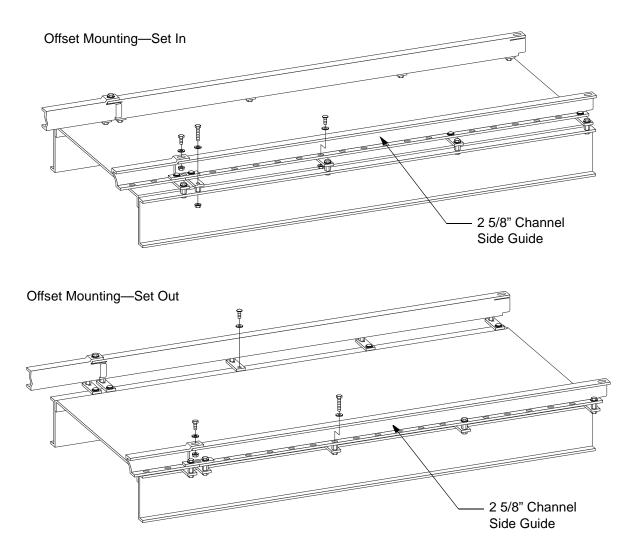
Channel Side Guides (2 5/8" Shown) Offset Mounting— Set In and Set Out
